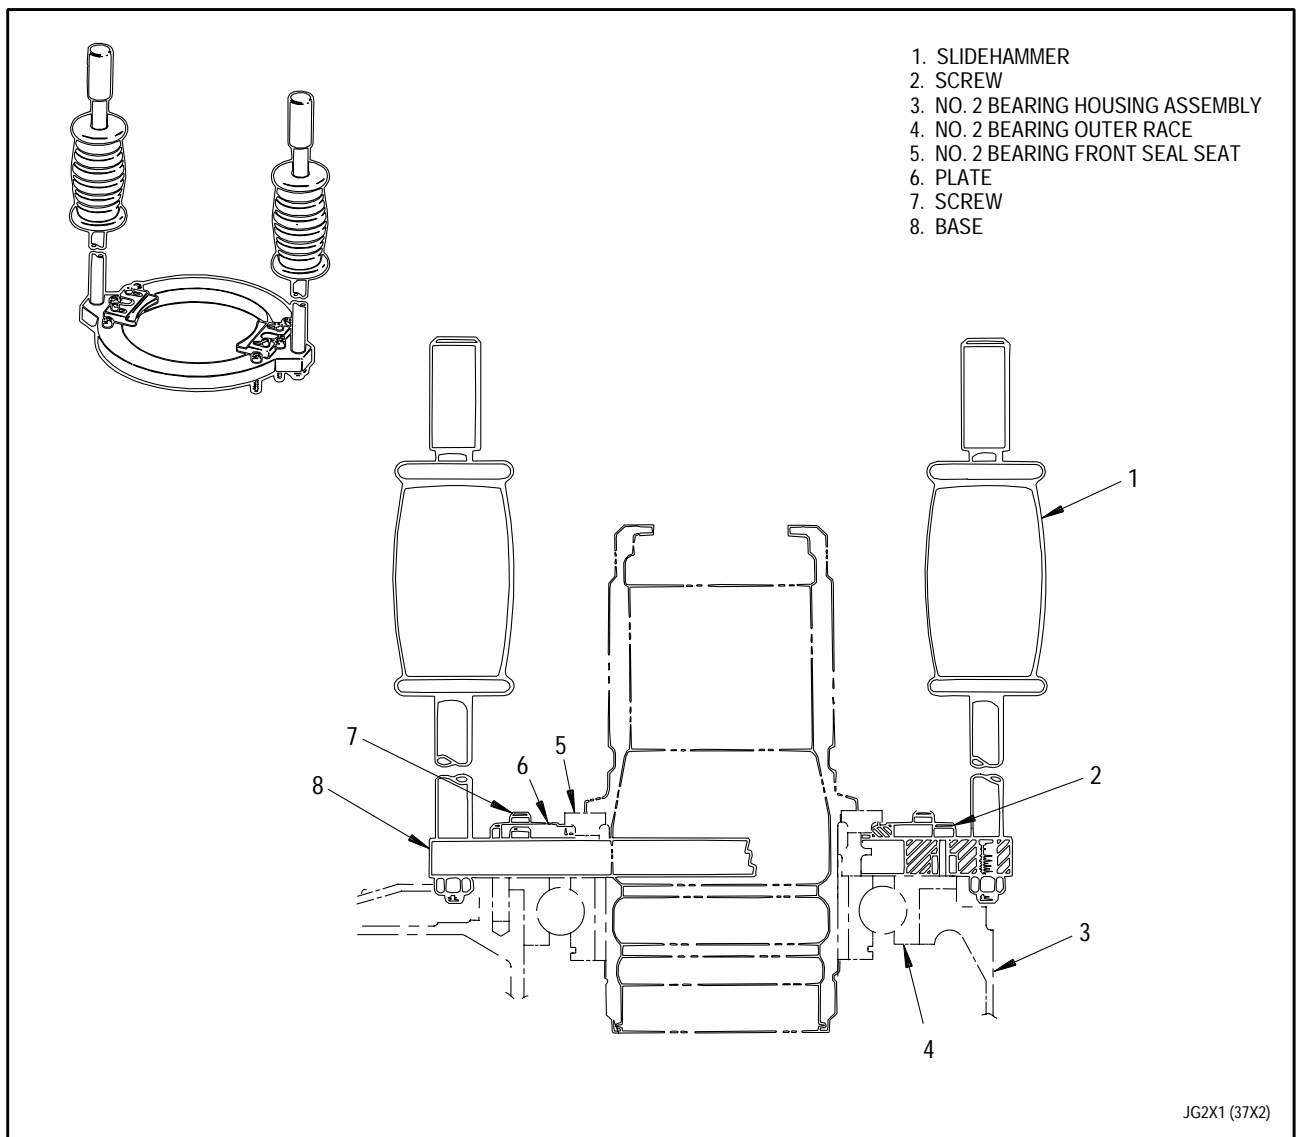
No. 2 Bearing Package - Removal with PWA 50704 Puller
